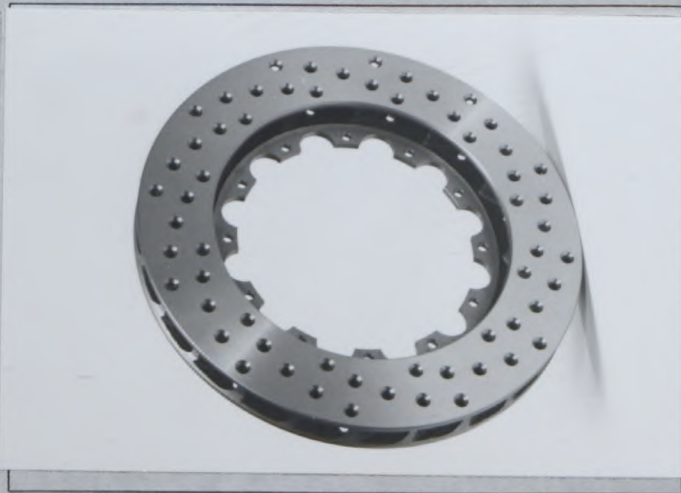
FRONT AND/OR REAR BRAKE DISC,
